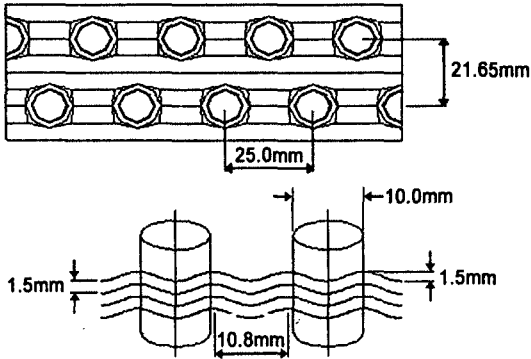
Schematic drawing of the wave fin-and-tube heat exchanger.
